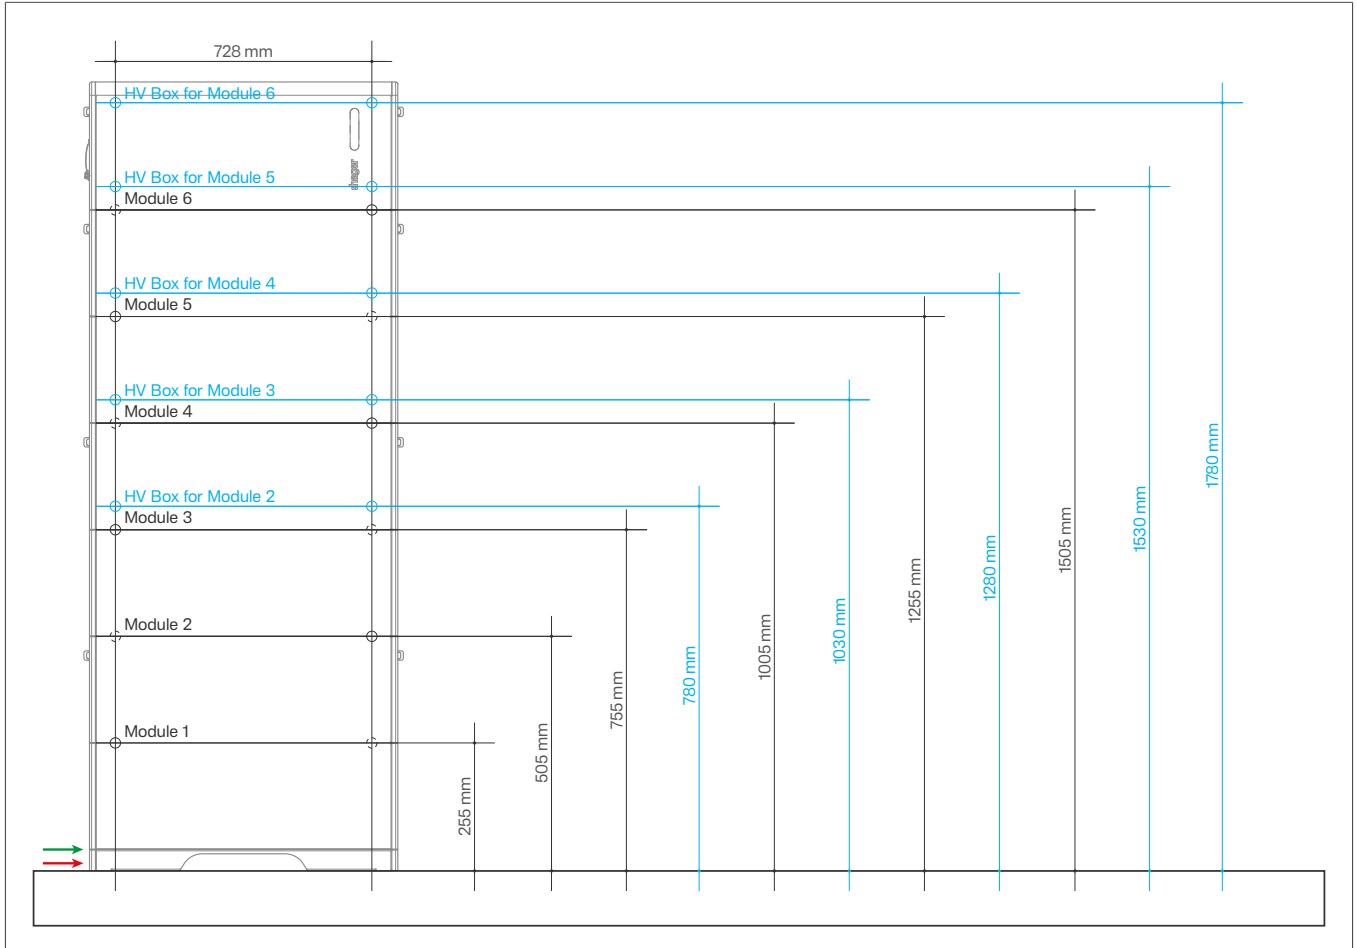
Dimension drawing of the supplied drilling template (similar to figure)
